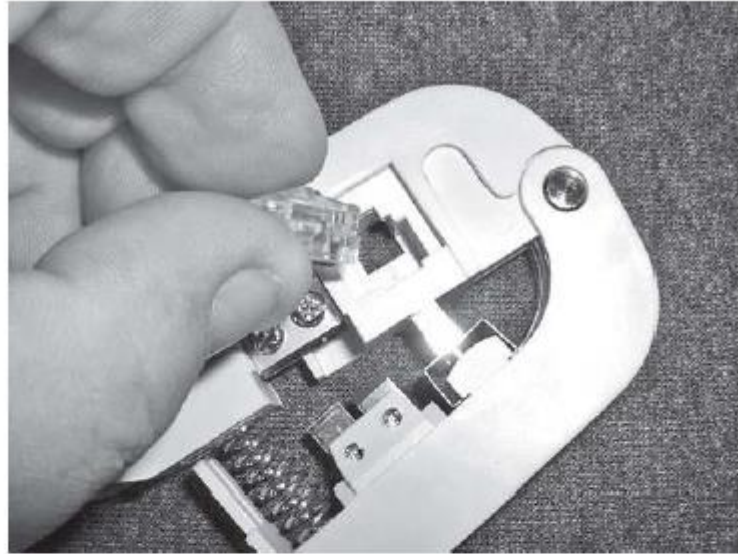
■ Placing a Modular Plug into the Tool Cavity
